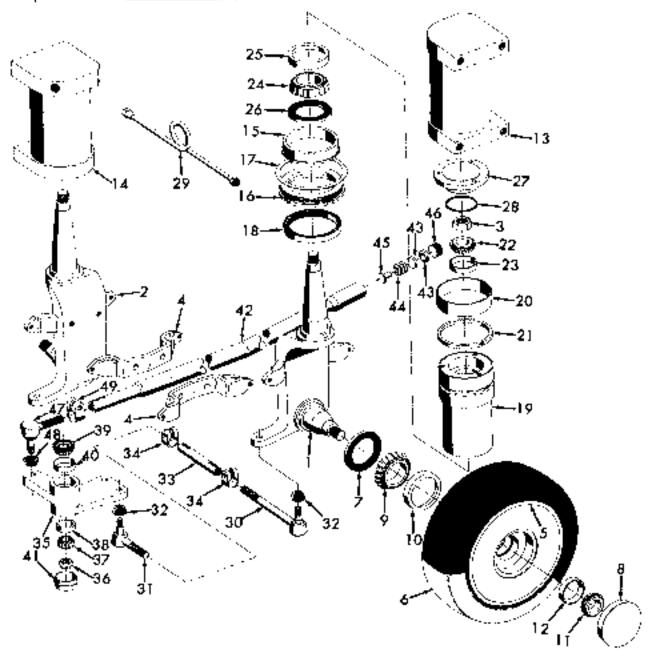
HYDRA HIZER, STEERING WHEEL AND LINKAGE
